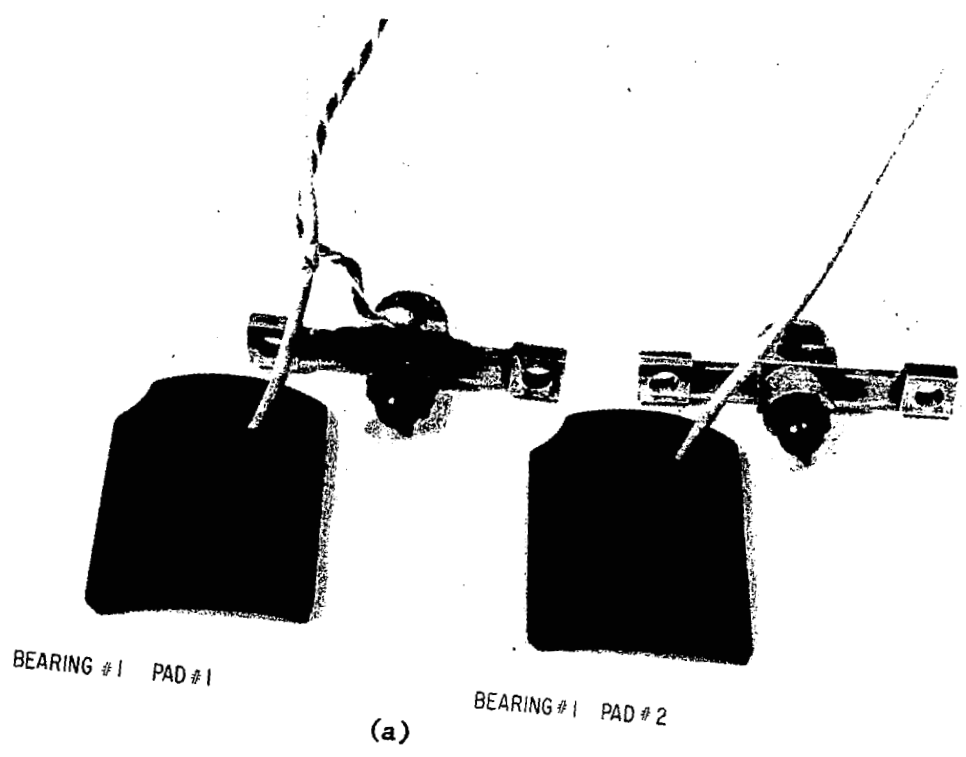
Compressor Journal Bearing Pads, Rear View with Pivots, Inspection 5
